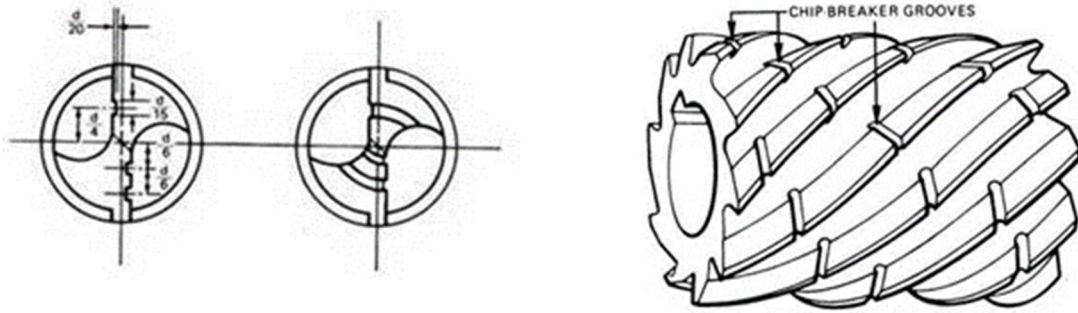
Chip breaking grooves for drilling and chip breaking grooves on a plain helical milling cutter
